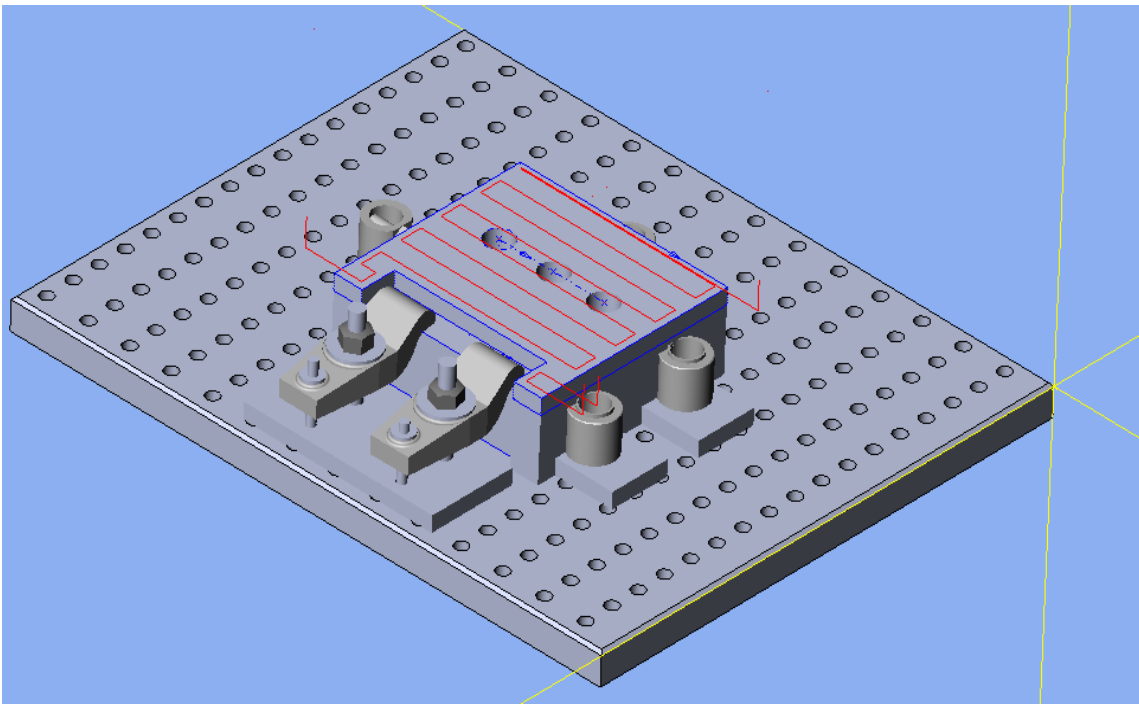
Toolpath for machining the workpiece using the modified fixture design
